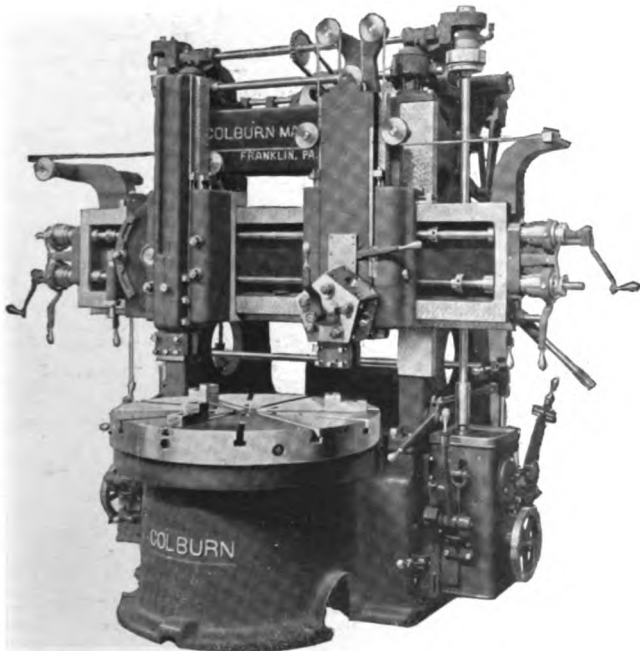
48-in. (1 219 mm.) VERTICAL BORING AND TURNING MILL WITH ONE SWIVEL AND ONE TURRET HEAD AND THREE JAW COMBINATION CHUCK
